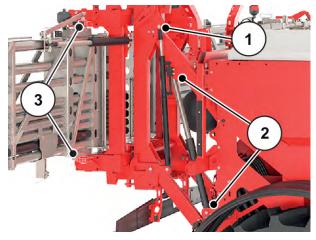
Joint bearings on hydraulic cylinder for pendulum frame locking mechanism
